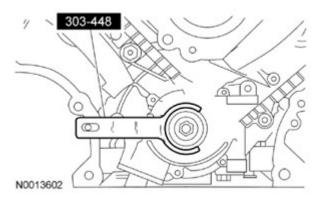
Positioning Crankshaft Using Crankshaft Holding Tool Courtesy of FORD MOTOR CO.
